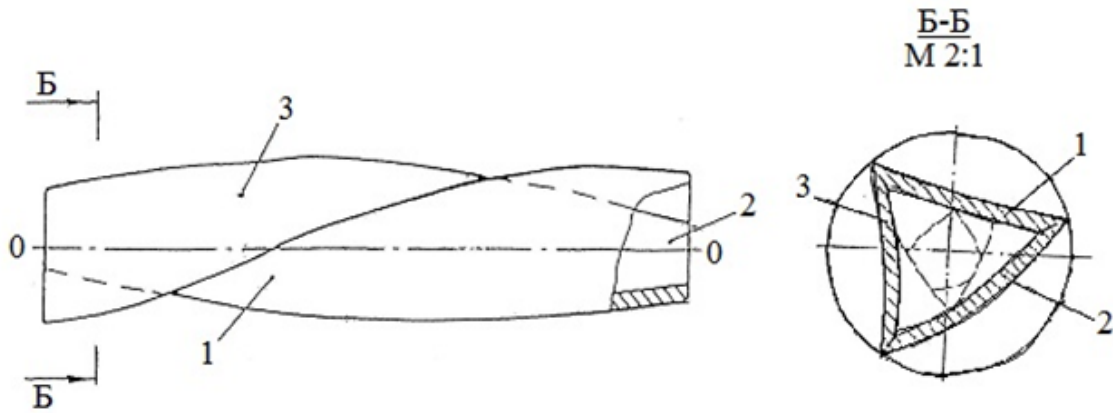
Screw body of the rotary kiln made of rolled strips, general view and section B-B
